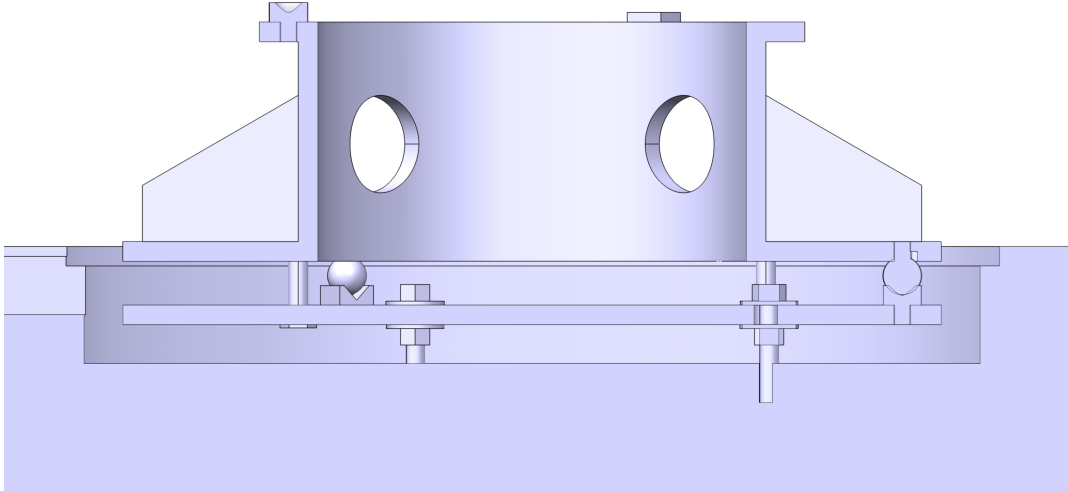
A section view of the lower pier/acceptor plate/concrete pier assembly. The holes in the walls of the lower pier allow for cables to pass through the telescope and upper pier and out through the lower pier.
